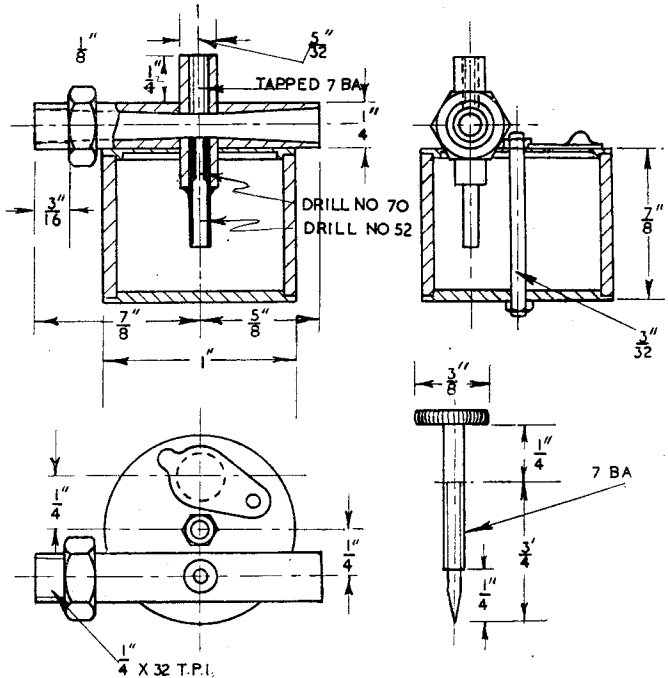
Carburettor; the fuel tank can be omitted if a separate fuel tank is desired
